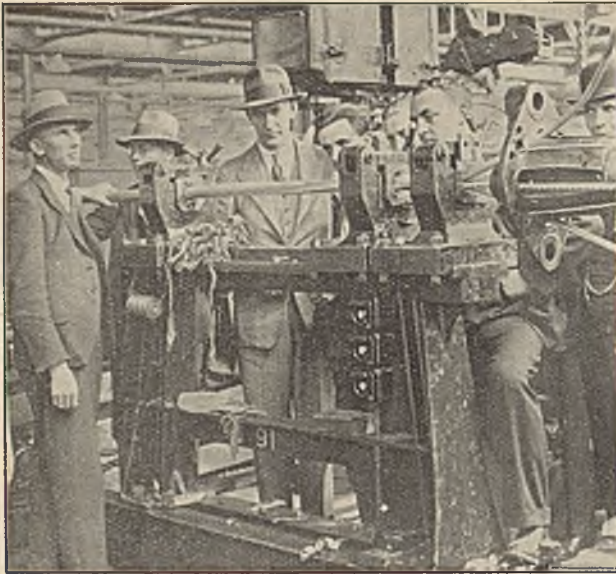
Cores and Packings passing through dies on a Laying-up Machine.
